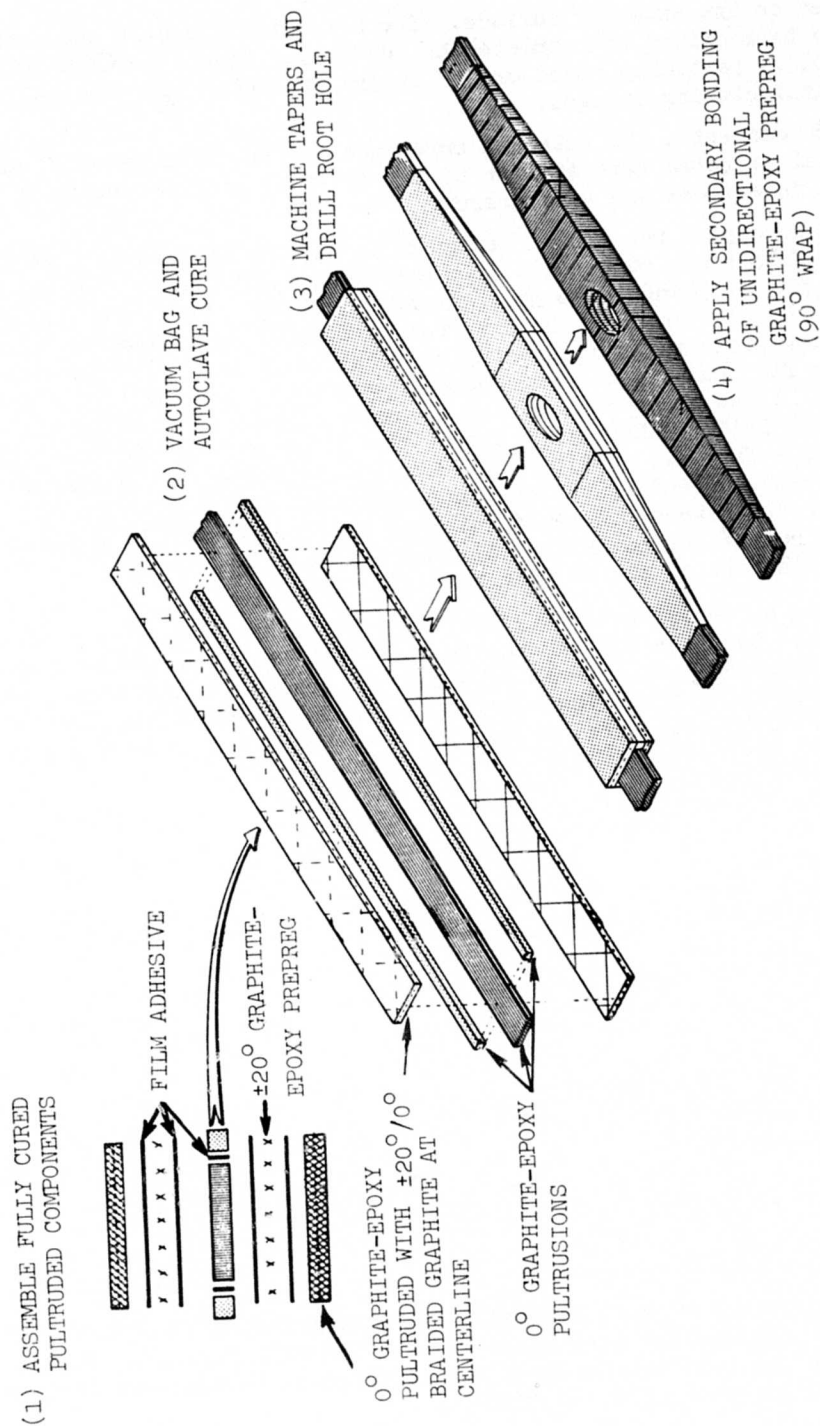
Concept I - Fully Cured Pultruded Spar Design Layout and Manufacturing Approach.
